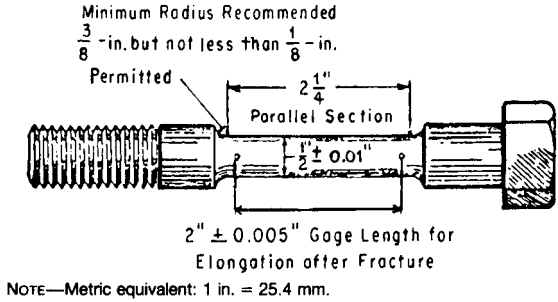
TENSION TEST SPECIMEN FOR BOLT WITH TURNED-DOWN SHANK
